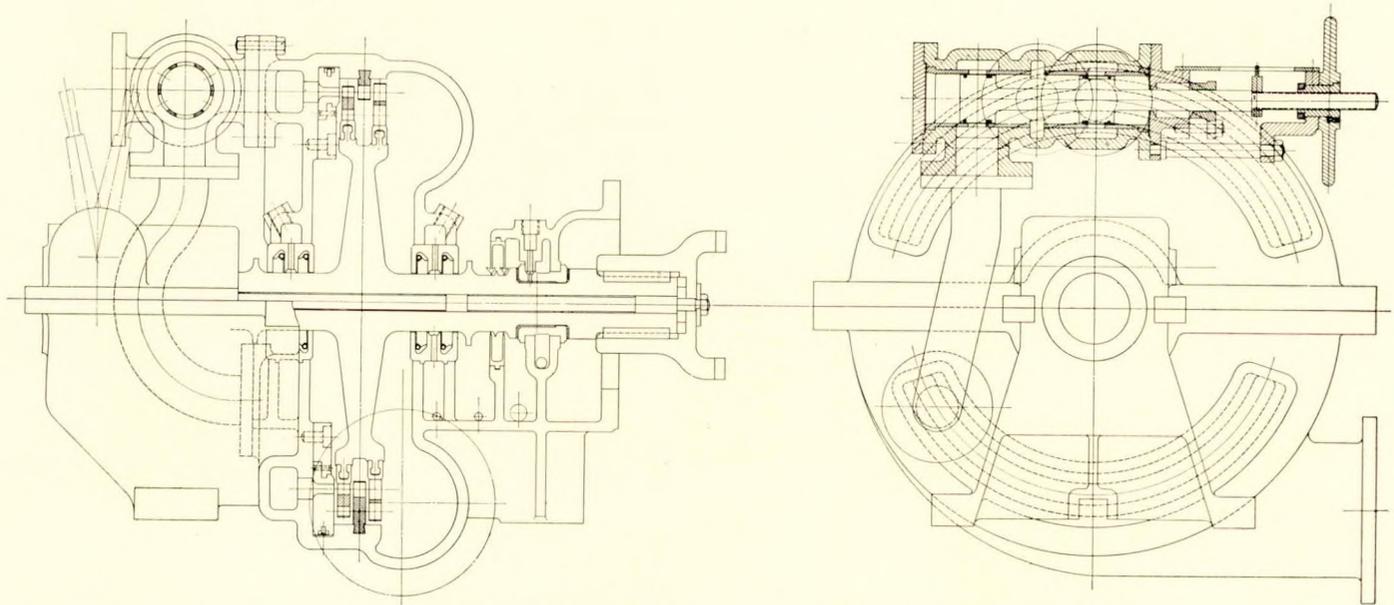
"Get You Home" steam turbine for 3,340 s.h.p. gas turbine installation
